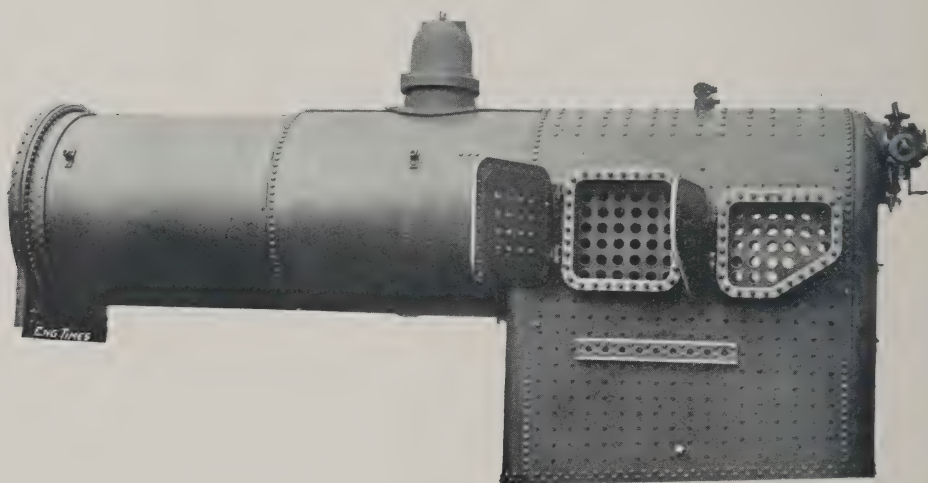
VIEW SHOWING DRUMMOND'S PATENT WATER TUBES, AS FITTED TO A LONDON AND SOUTH-WESTERN RAILWAY PASSENGER LOCOMOTIVE.
